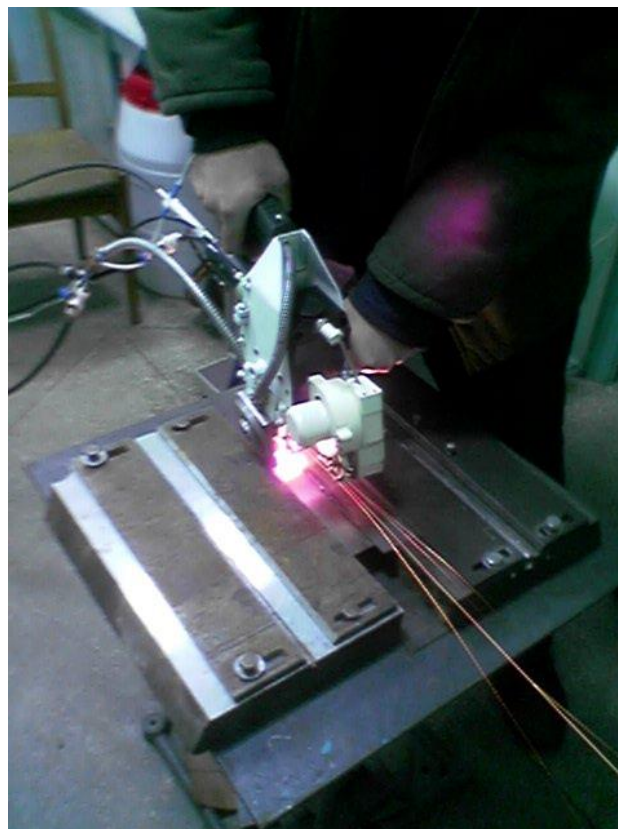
The process of laser welding of thin black steels by an employee of the Paton Electric Welding Institute during the testing of the welding tool mock-up. The tool is paired with a 2 kW diode laser.
